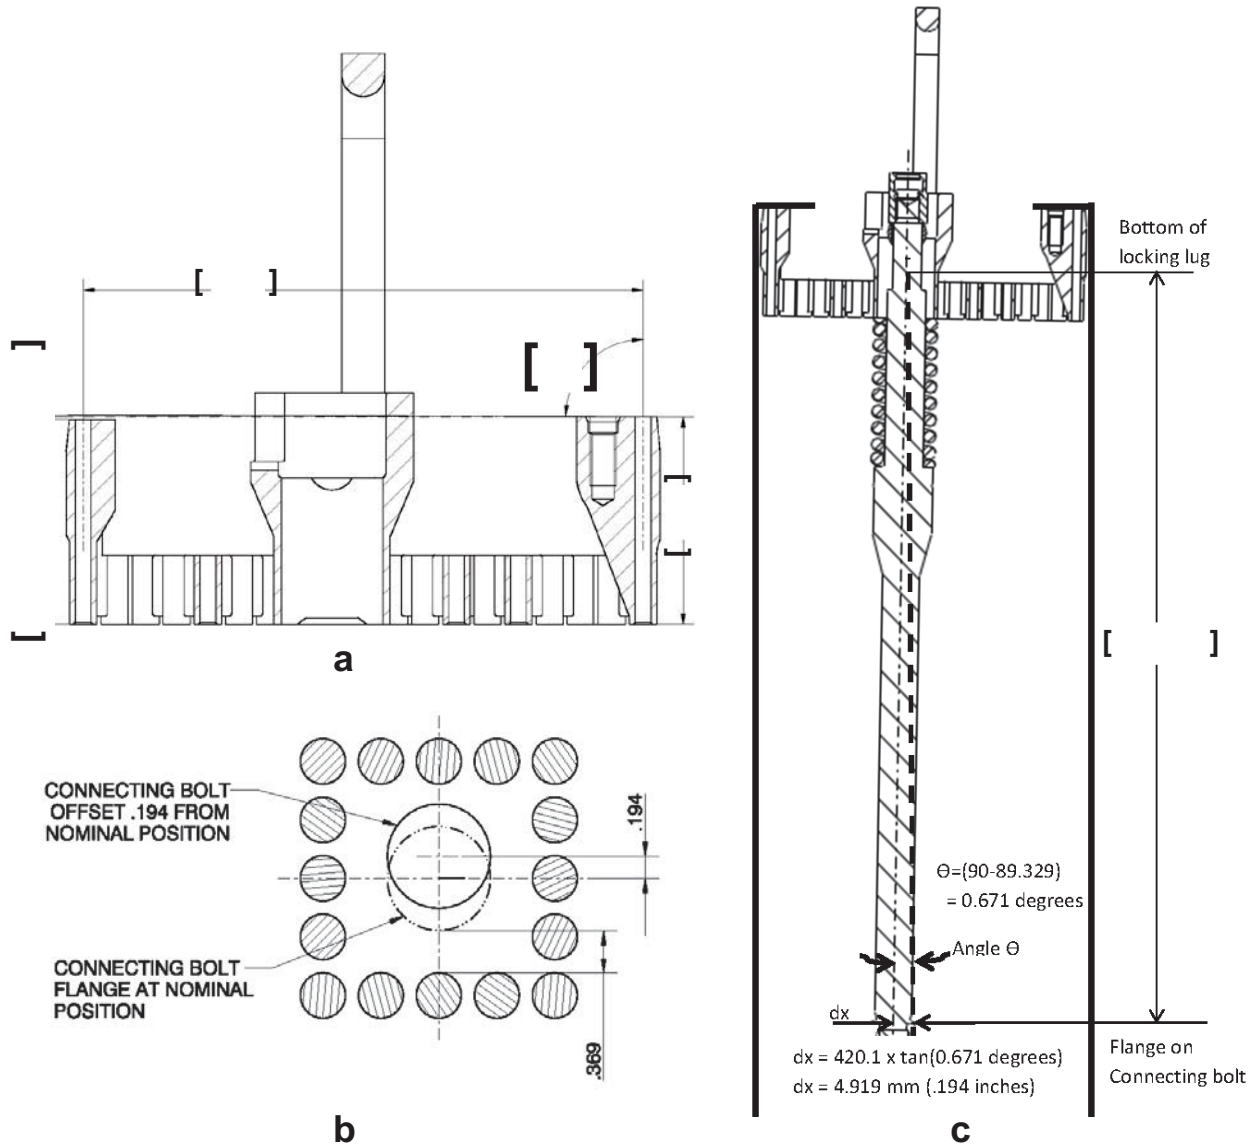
UTP showing maximum tilt based on tolerance and geometry
